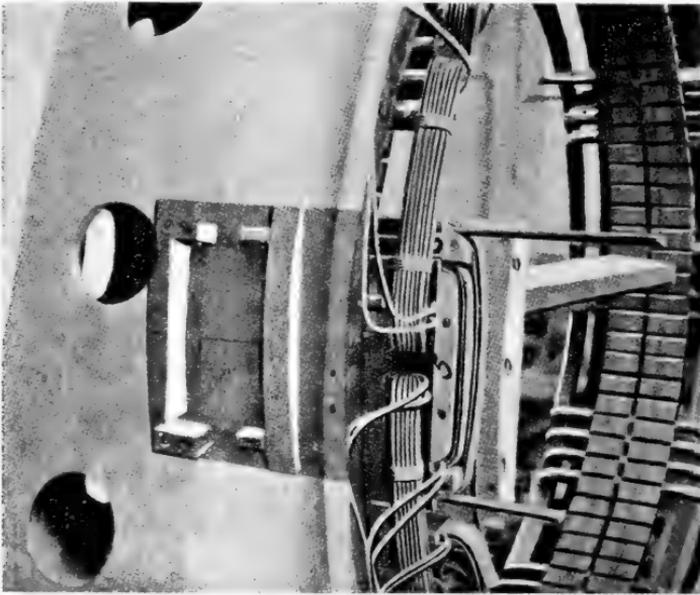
Hand Winding of Alternator Coils (Alioth Co.).
